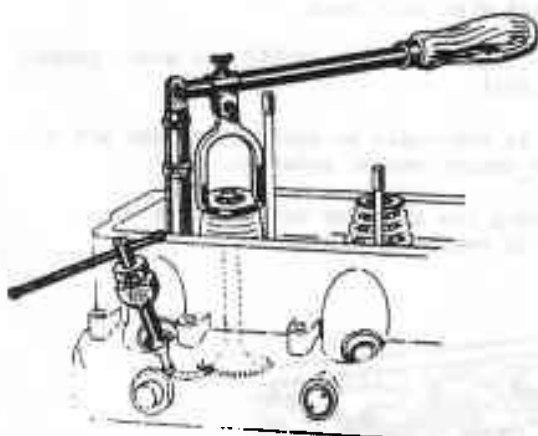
INLET VALVE SPRING COMPRESSING TOOL.
